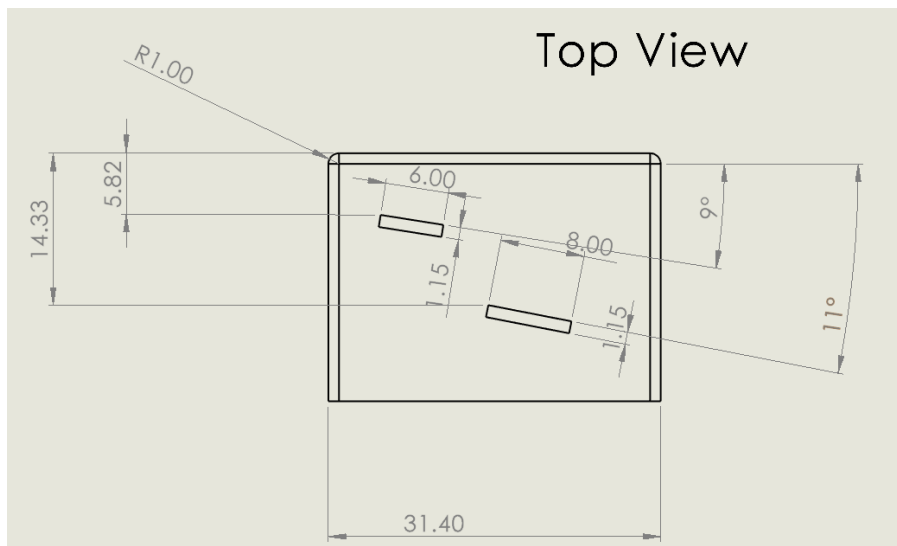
Top view in mechanical drawing of Prototype 4, the unprinted final prototype. Dimensions are labeled, and full mechanical drawing is provided in Appendix C.4.
